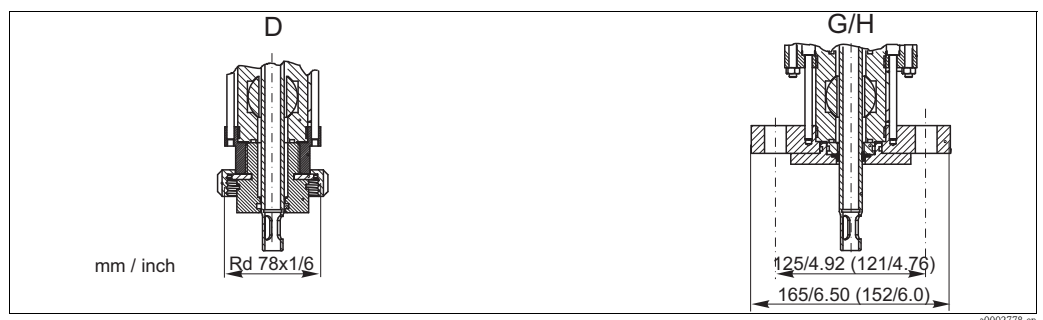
Process connections CPA474 (dimensions in brackets: ANSI flange)
